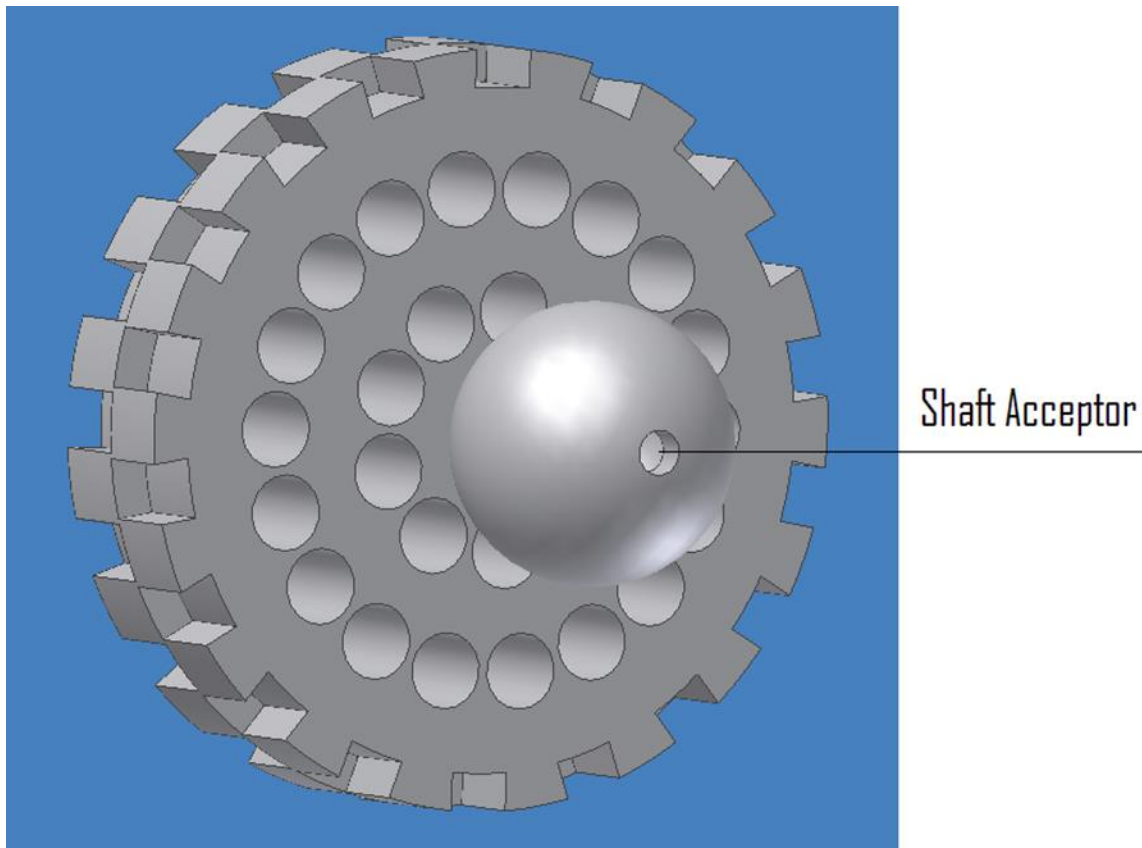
ZOOB wheel to be driven by a piece with a motor housing
